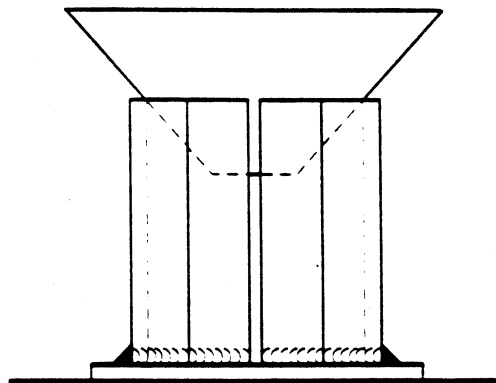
Example for notch tensile test for pipe test piece diameter  $\leq 25$  mm
